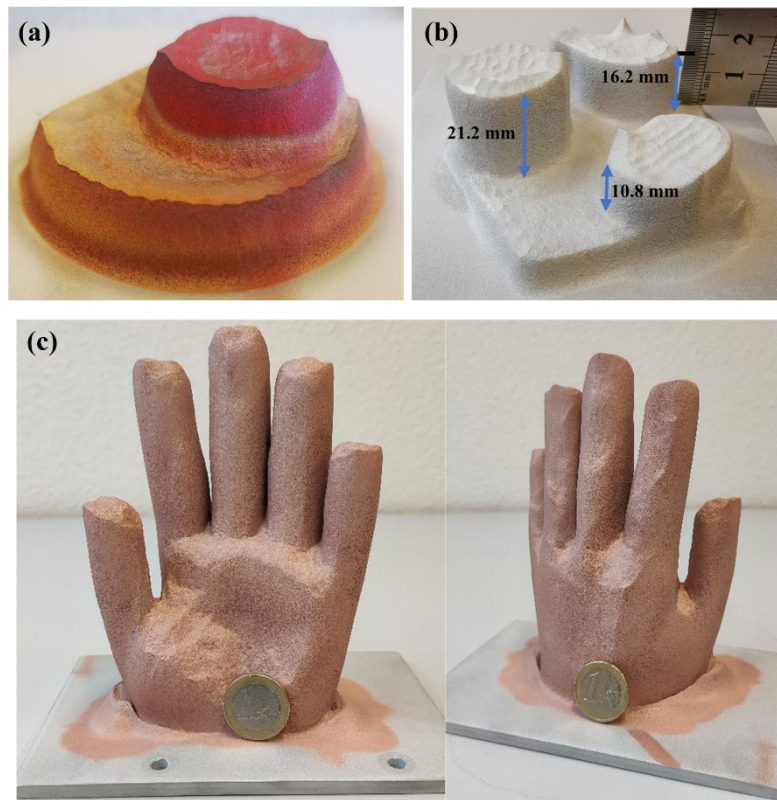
The deposits: (a) with a single feature; (b) with multiple features; (c) a copper hand (Ref 25)
